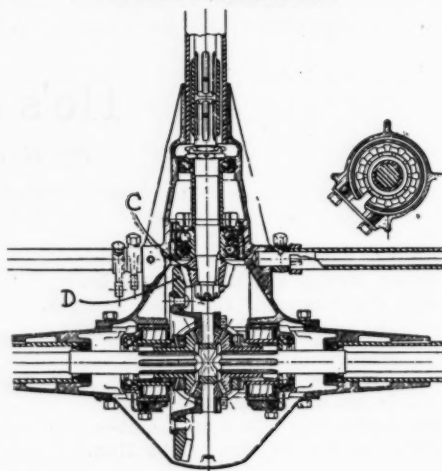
Rear axle on Grant six, showing adjusting nuts
